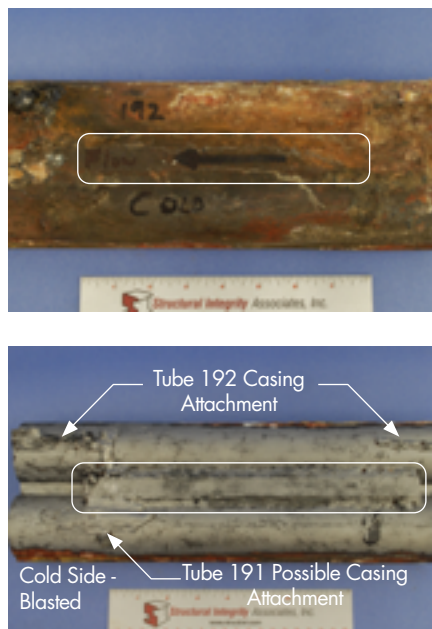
Additional photographs of the cold side of the tube after removal of the OD deposits/oxides where a number of pad welds were noted.
